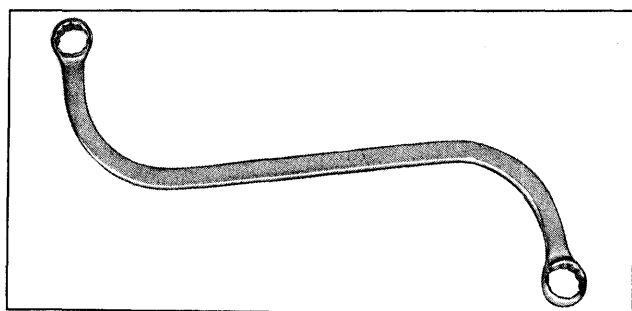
Front Door Hinge Tool J-22729 (9/16" Box) - "B, C & E" Styles
